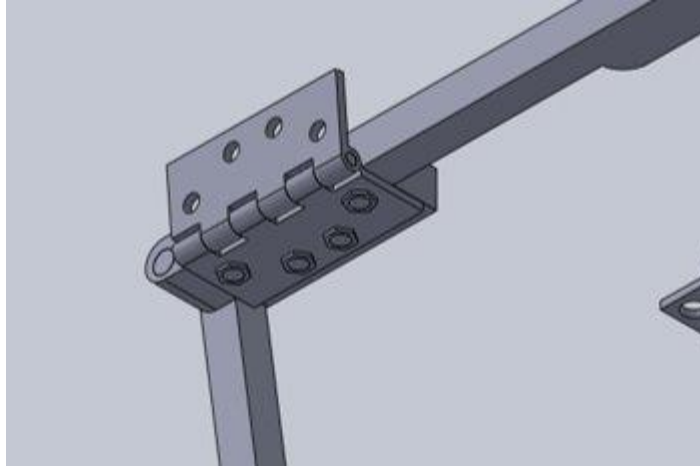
Bottom view of surface mount hinge attached to coupler link.
